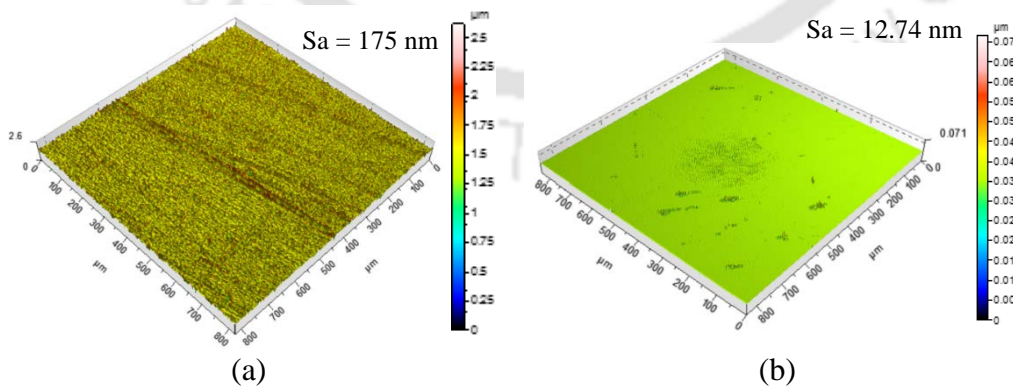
Best 3D surface topography image (i.e. optical profilometer image) of (a) initial and (b) final of Ti alloy workpiece after finishing using parallel toolpath (Exp. No. 1 in Table 3.3)
